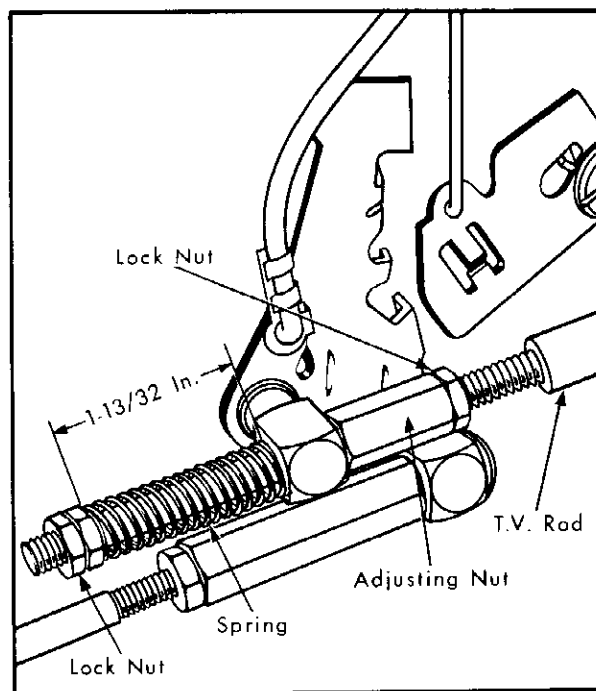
T.V. Rod Adjustment - Eldorado Engine
